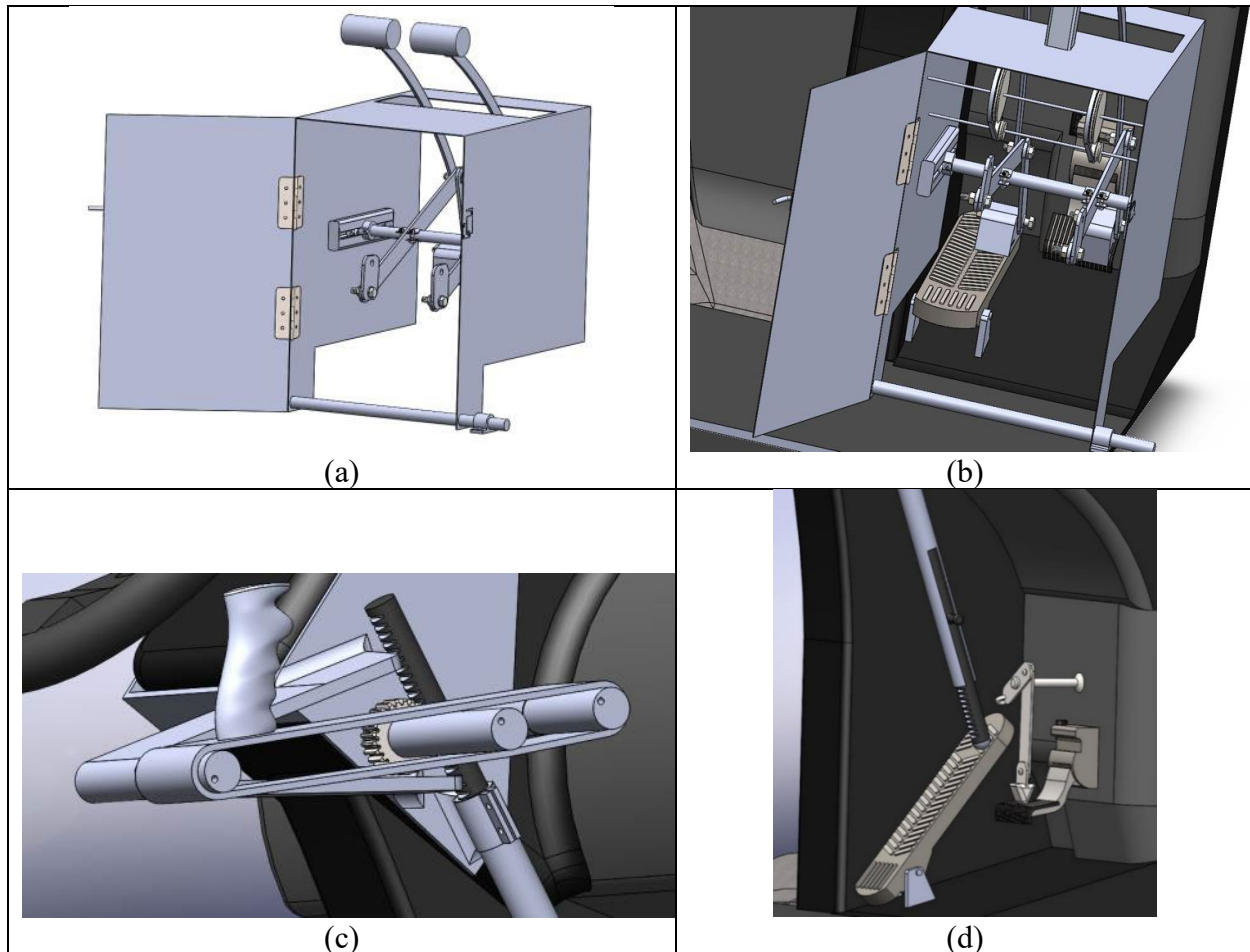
(a) and (b) showing the universal design and (c) and (d) showing the fixed design, each using a combination of reverse linkage mechanisms to control brake and accelerator pedals.
